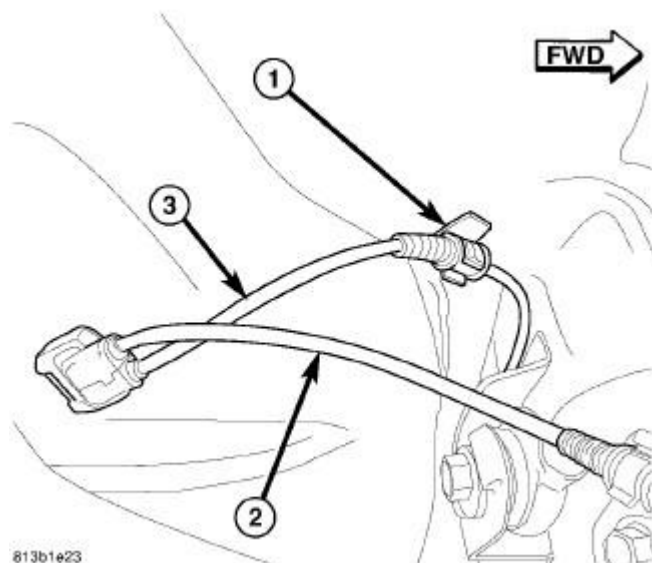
Left/Right Rear Wheel Speed Sensor Cable & Routing Clip
